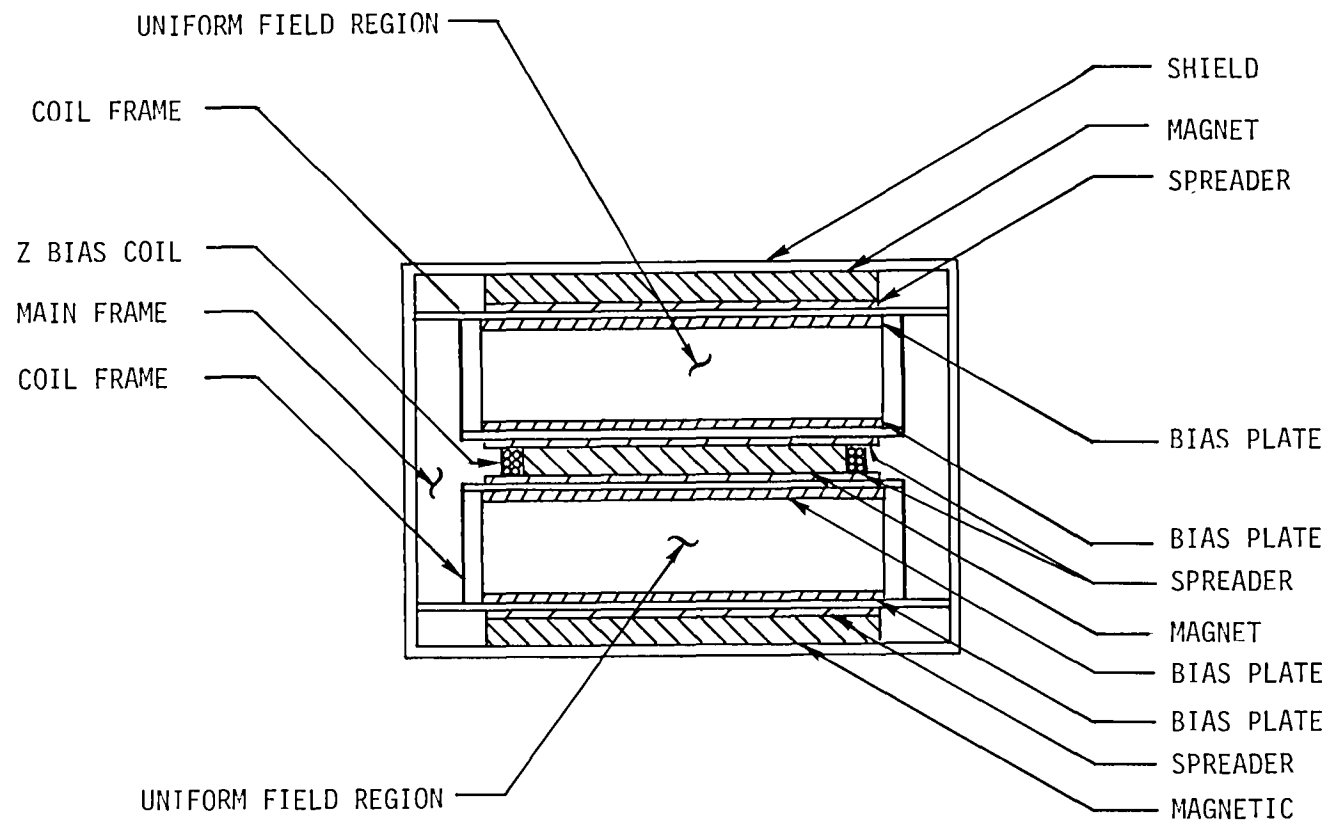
TWO COIL BIAS ASSEMBLY SECTION
